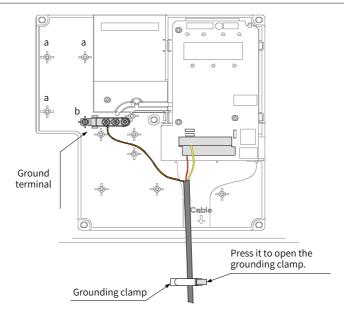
Connecting shield to the PE terminal of the AC drive
